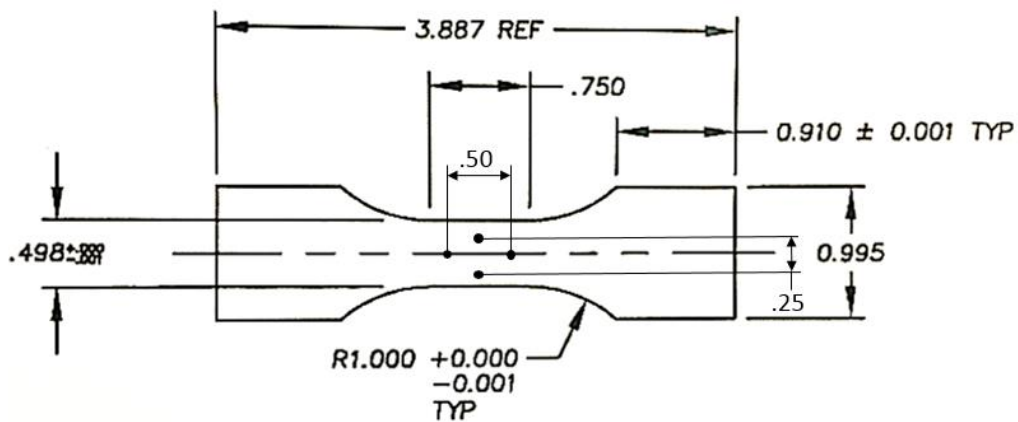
Tensile Test Geometry. Dimensions shown are in inches.
